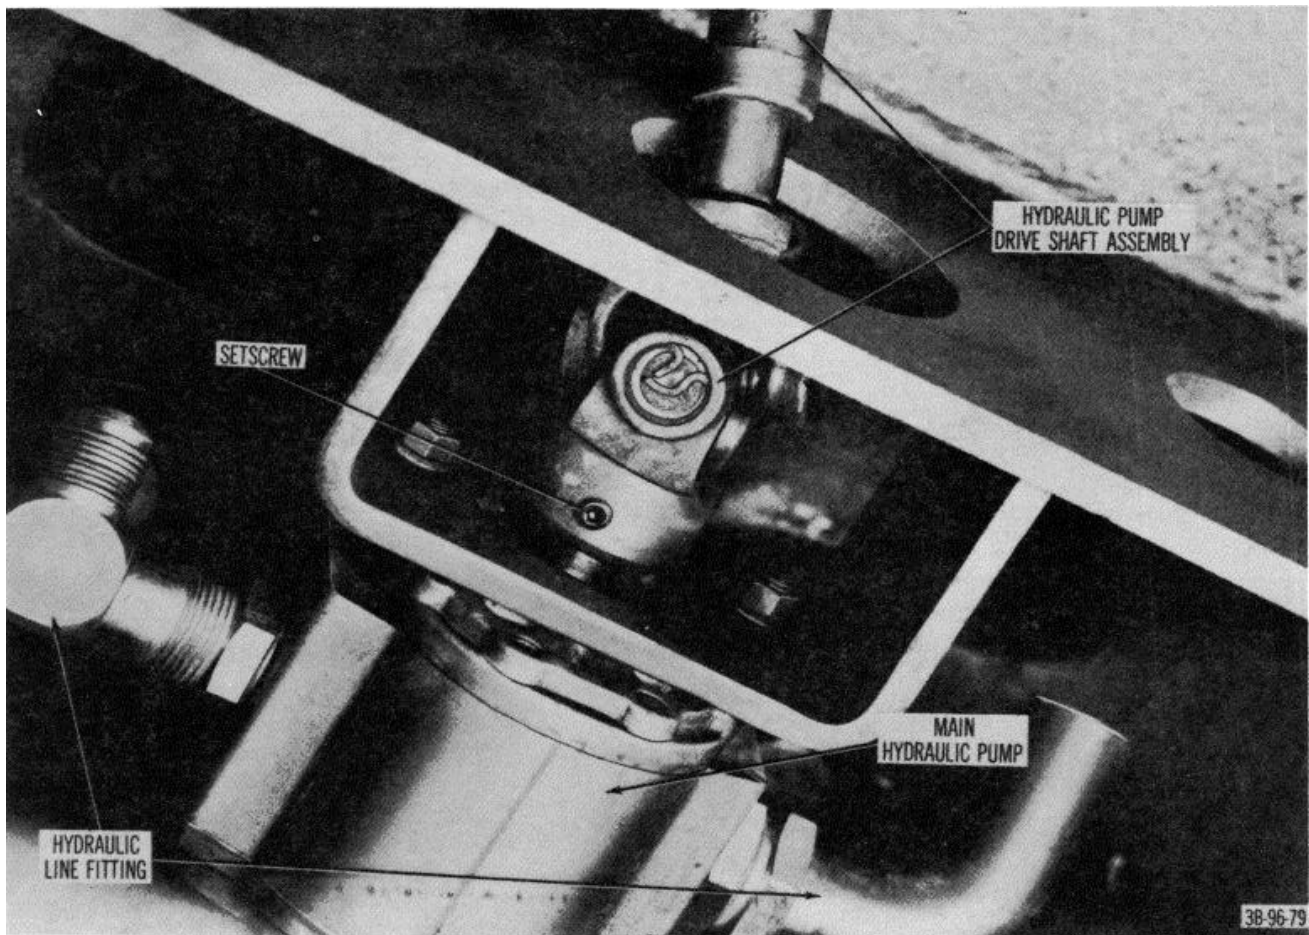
Main hydraulic pump and pump drive shaft assembly, installed on truck.
